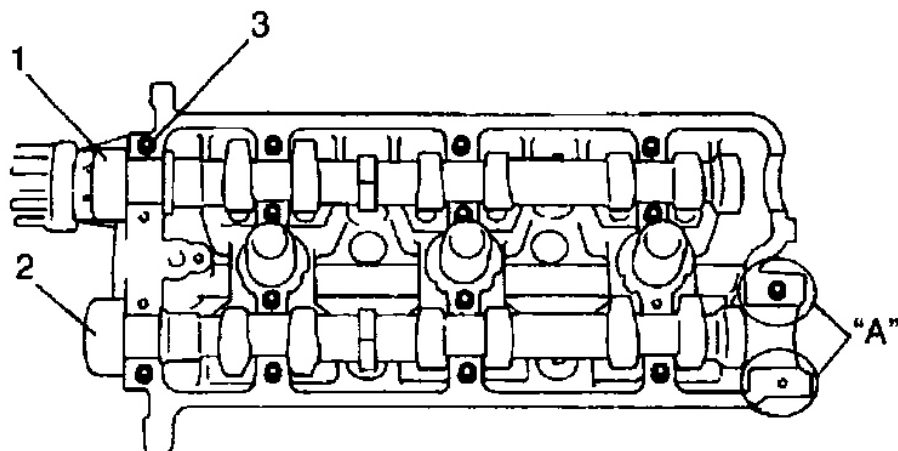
Aligning Match Marks On Cylinder Head And LH Bank Camshafts
